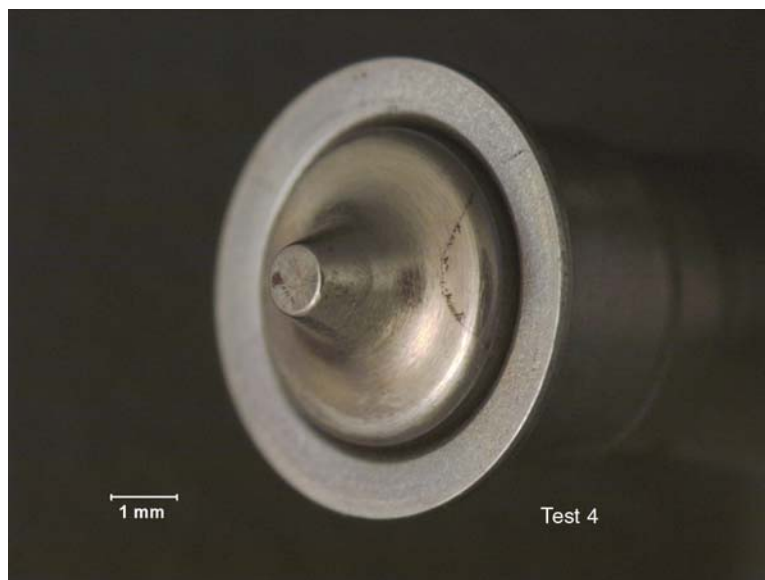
AF7868 SPK, Lower Hydraulic Coupler Piston
